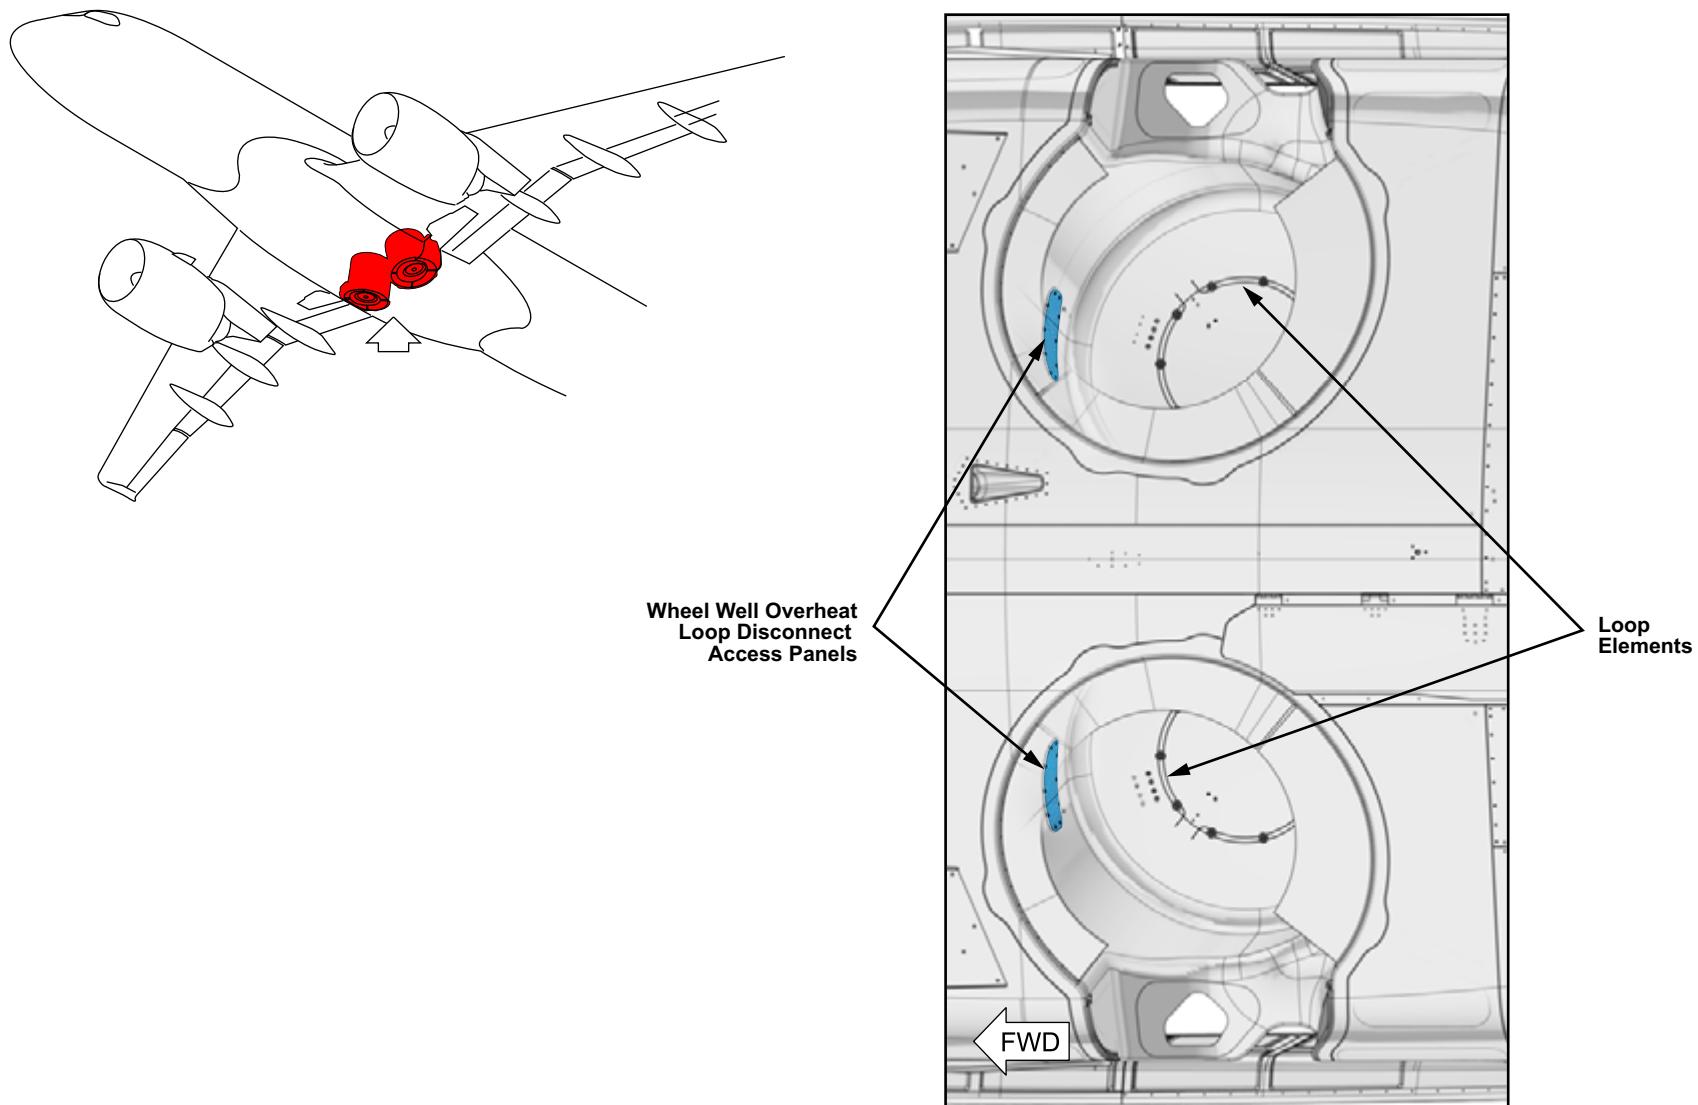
Main Wheel Well Overheat Loops Location (L2)
